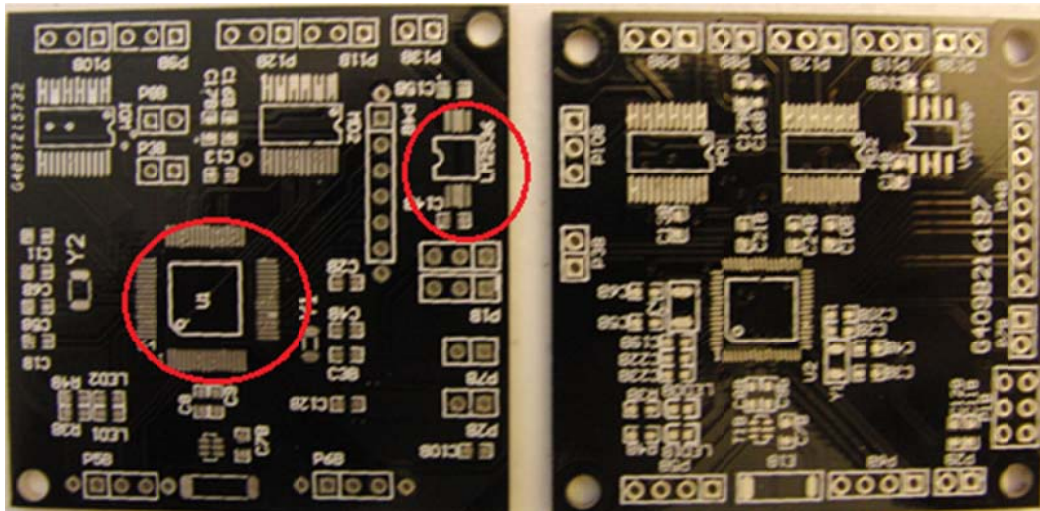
Defected PCB Boards on the left and Re-made PCB on the right
